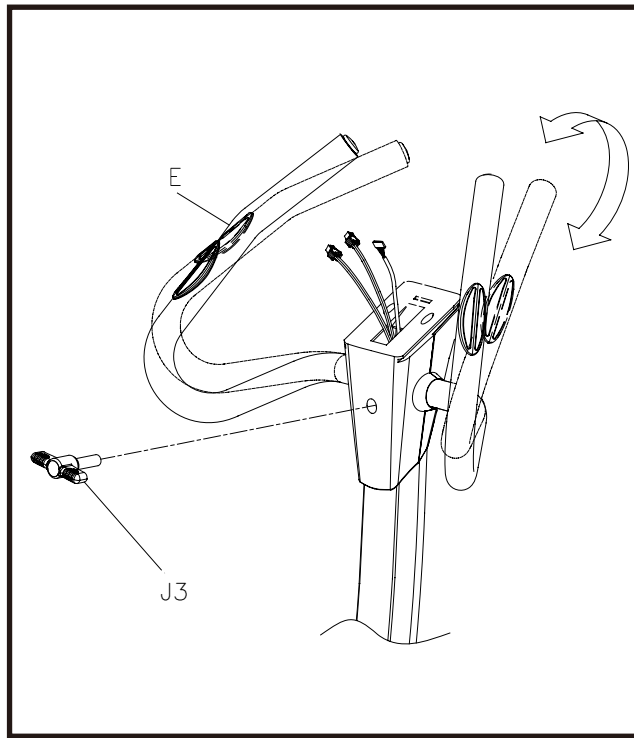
FINISH THE ASSEMBLY FOR COMPUTER HOUSING
